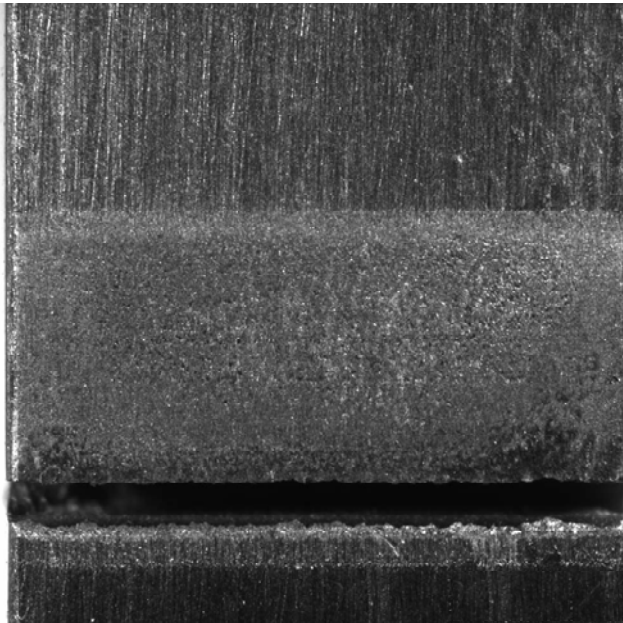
Fretting Scar from the Flat Pad Type 3 (FP3)
